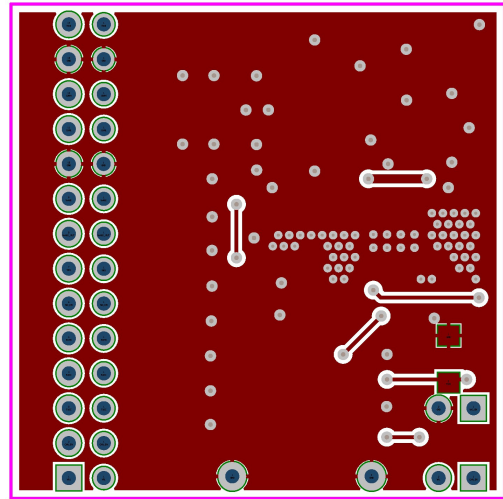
NCV7451 EVB PCB Bottom Drawing (Bottom View)
